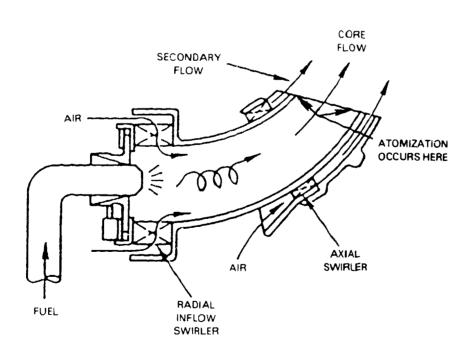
Carburetor Tube Main Zone Injector
